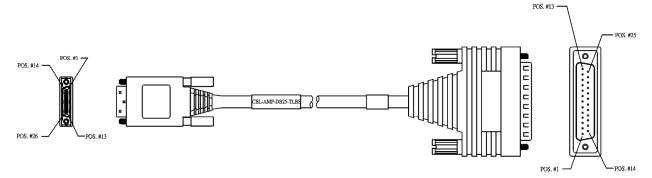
CBL-AMP-DB25-TLBS Cable
